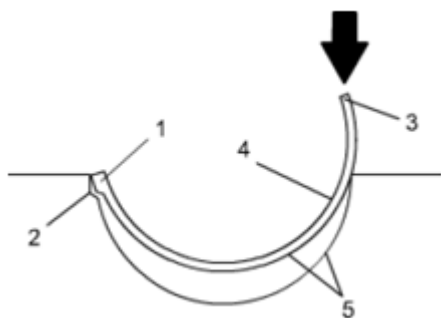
Identifying Camshaft Upper Bearing Half
